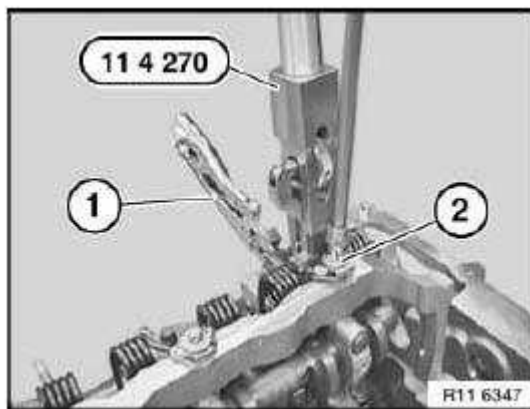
Torsion Spring Screw And Special Tool (11 4 270)
